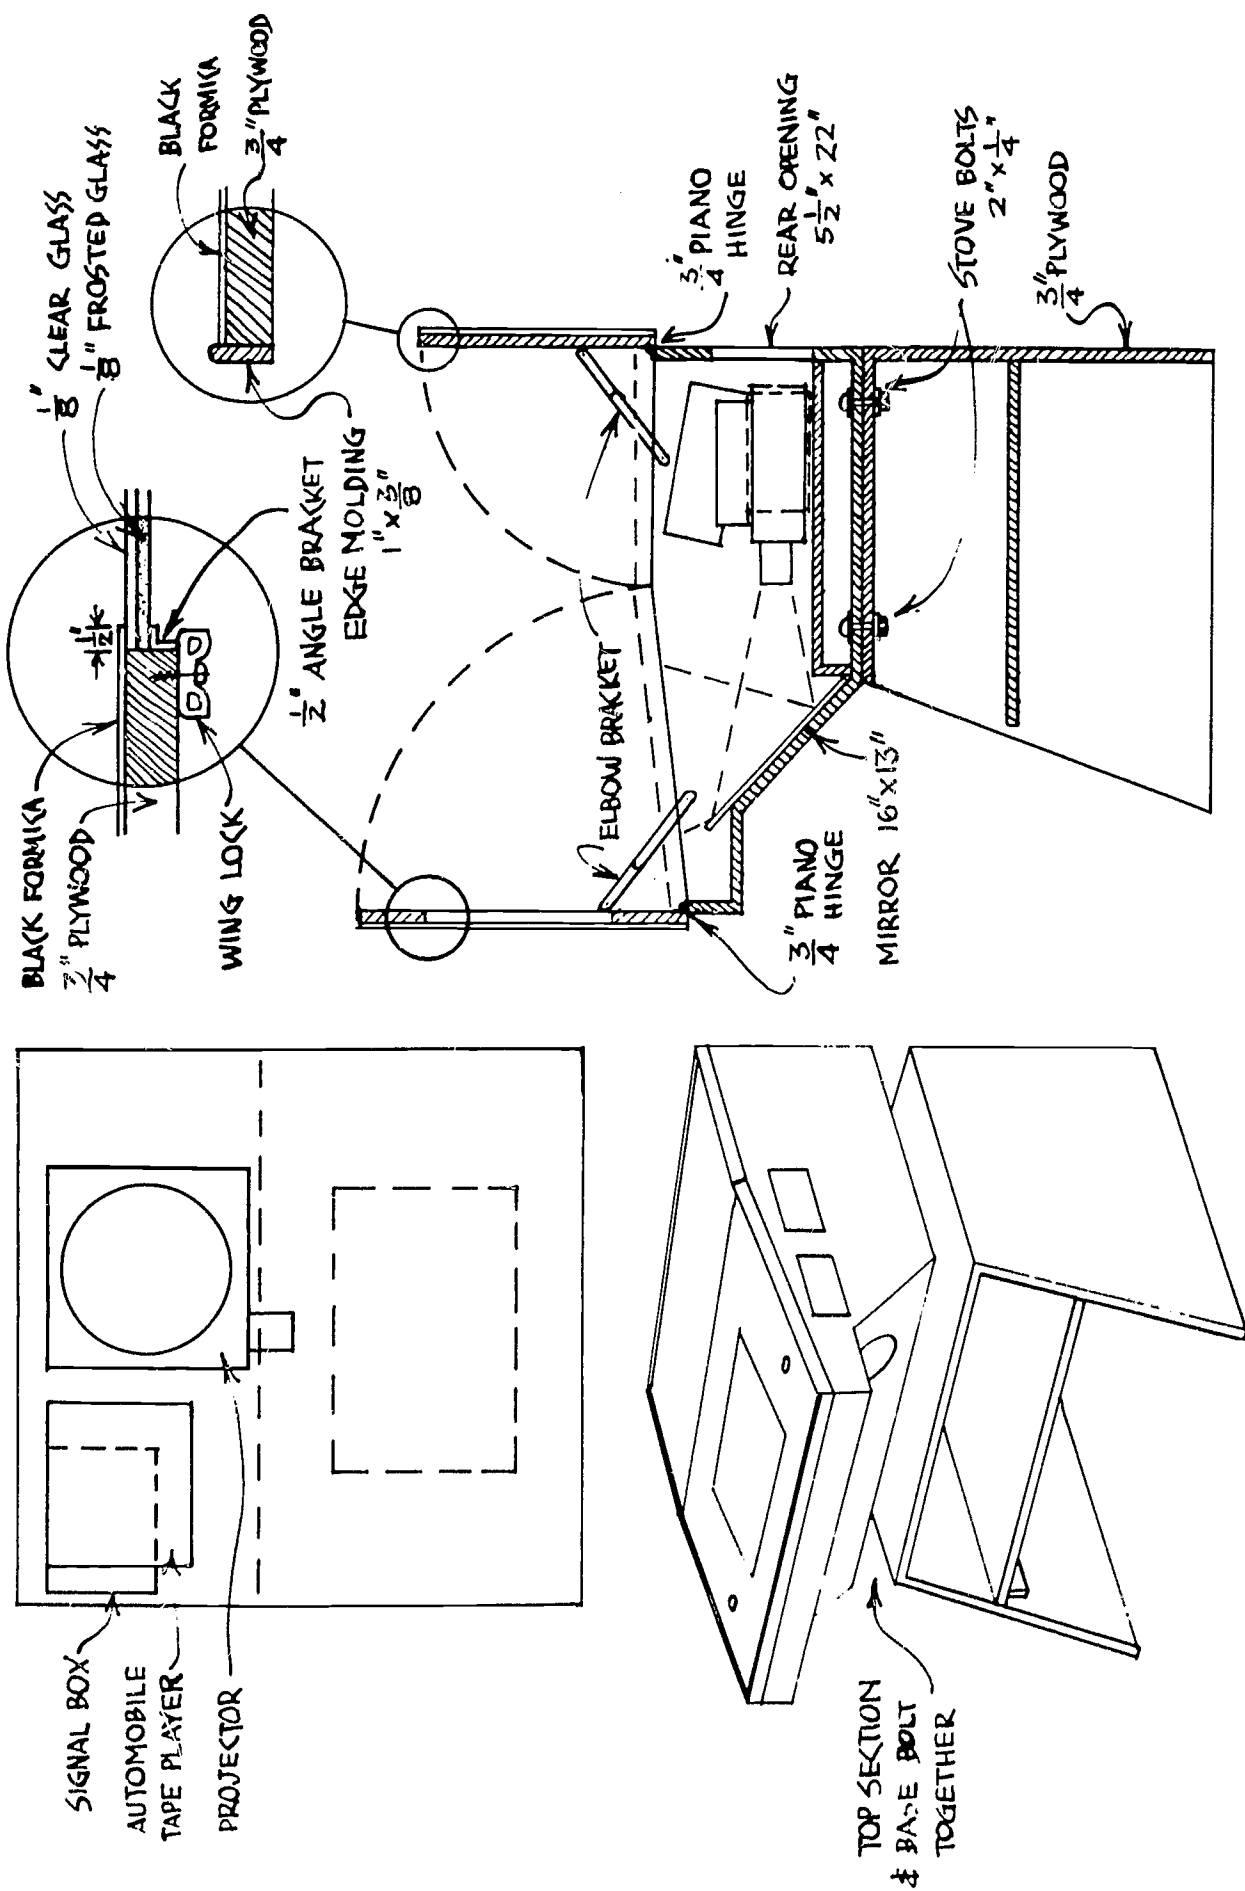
SECOND CONSTRUCTION DRAWING OF DESK
